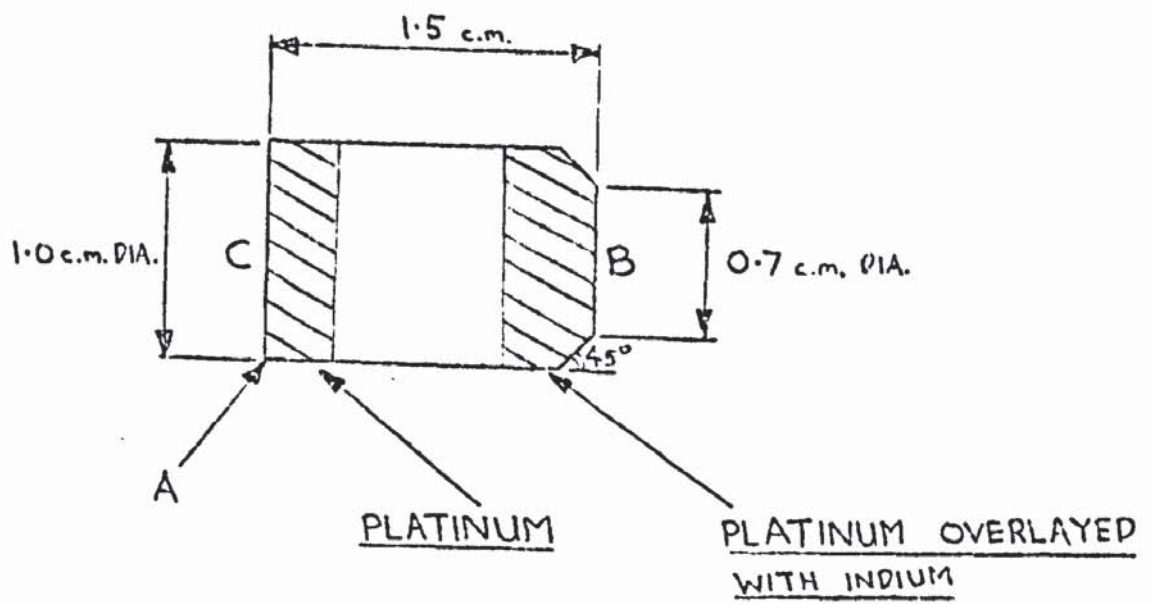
ACOUSTIC BUFFER SHOWING BEVELLING AND PLATING
